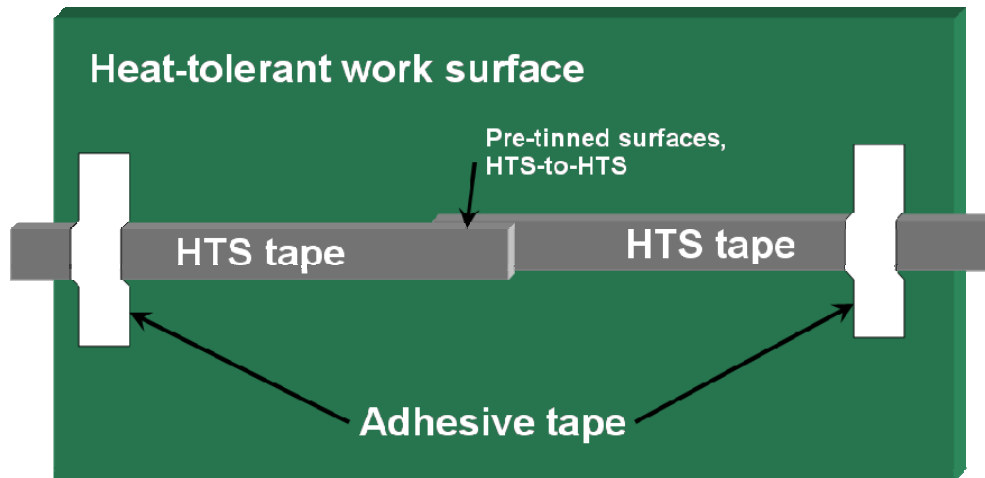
Method of Positioning and Securing HTS Wires for Soldering of Overlap Joint
